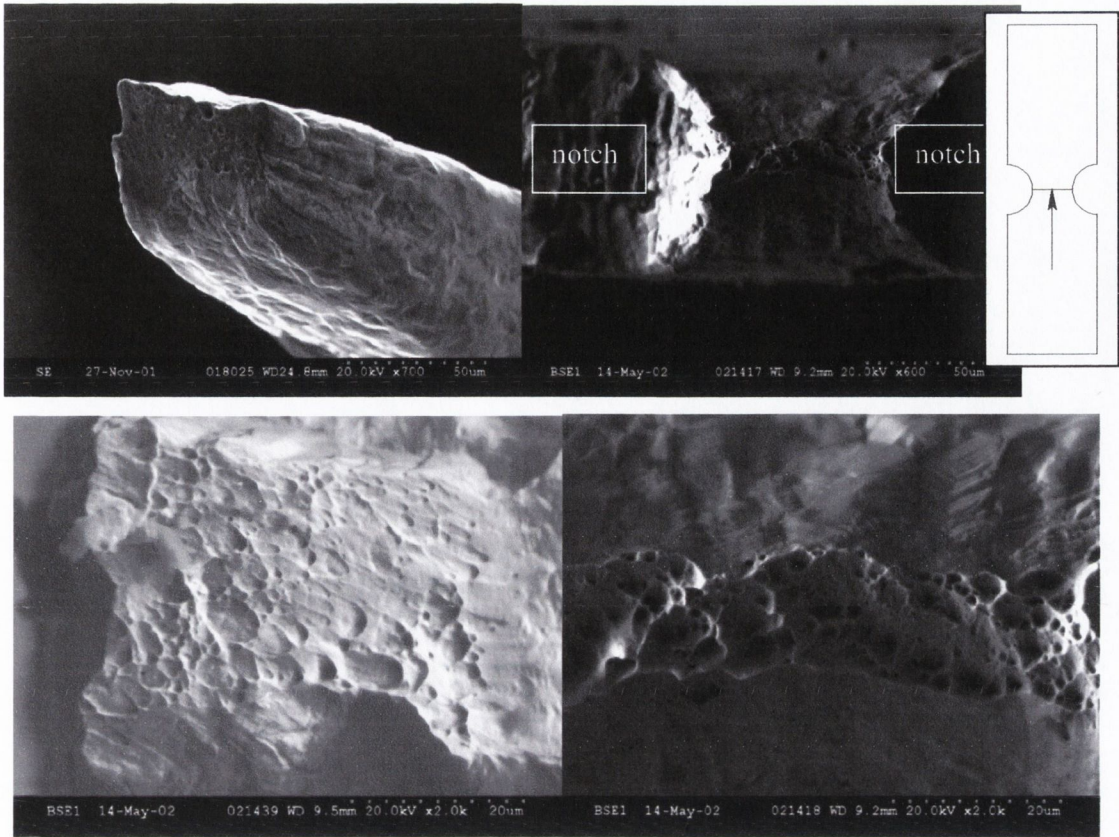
Tensile fracture surface of a plain wire
